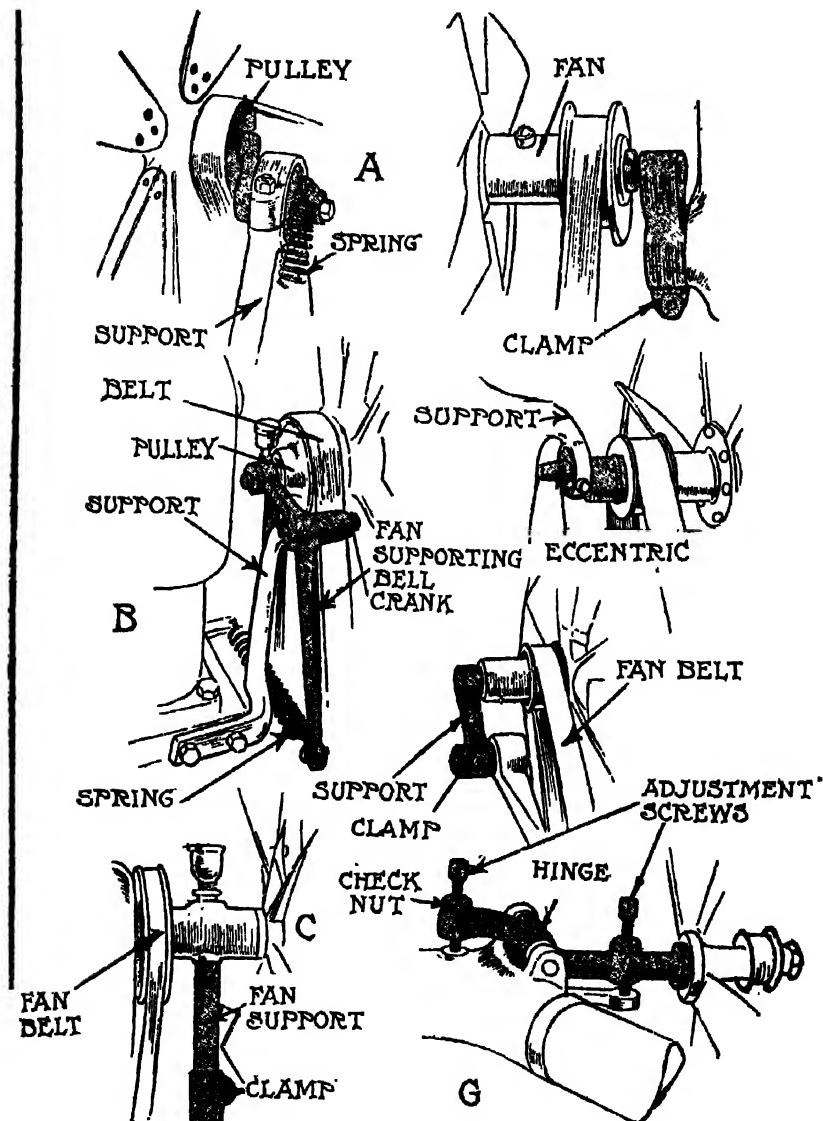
Methods of Adjusting Fan Belt Tension Outlined.
